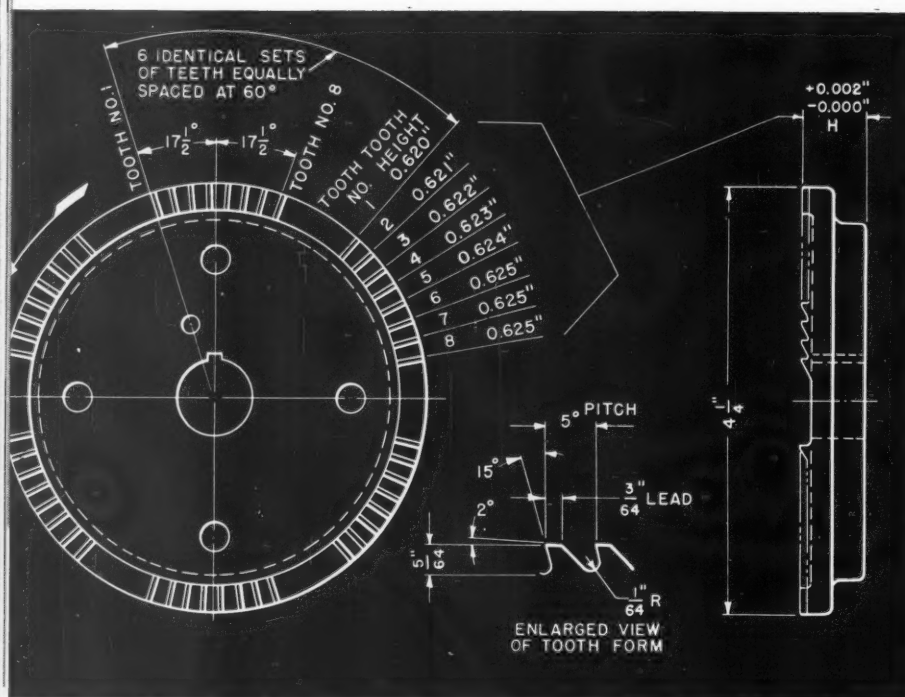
Details of the rotary broach (O) used on the fixture seen in Fig. 4 to machine surface (X) of counter-clutch lever, Fig. 3
